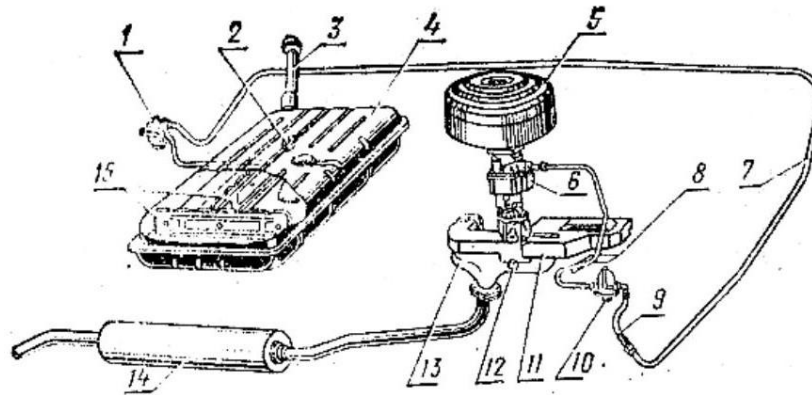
General diagram of the fuel supply system of a carburetor engine.
